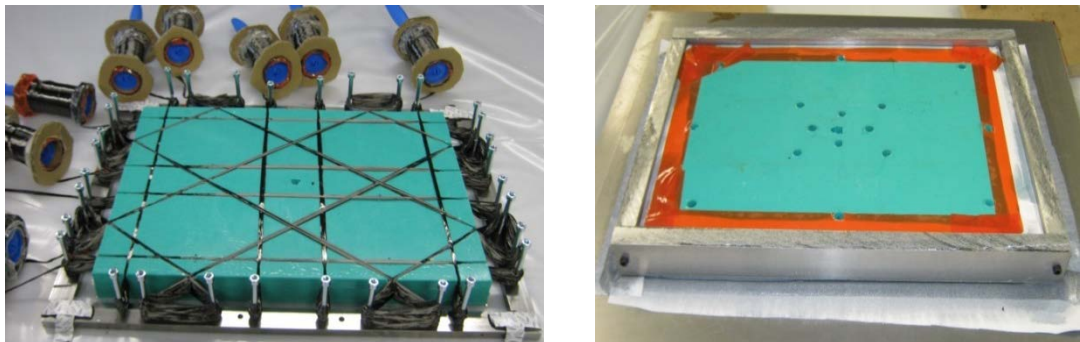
Dry/hand lay-up winding process and metal frames placed at the ends of mold.
